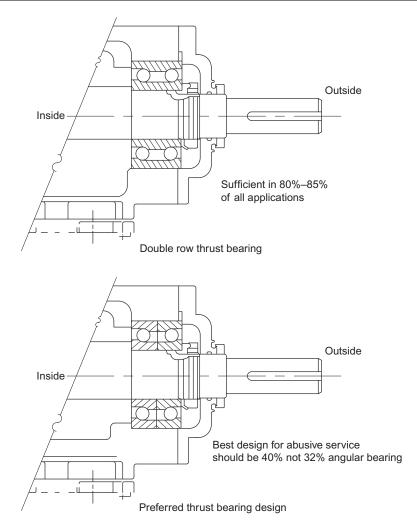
Thrust bearing design: (top) double row thrust bearing; (bottom) preferred thrust bearing design.
